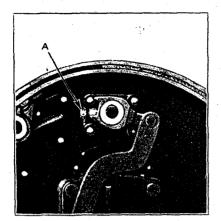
Front Wheel Brake Lubricating Connection. (Front Wheel Removed.)
